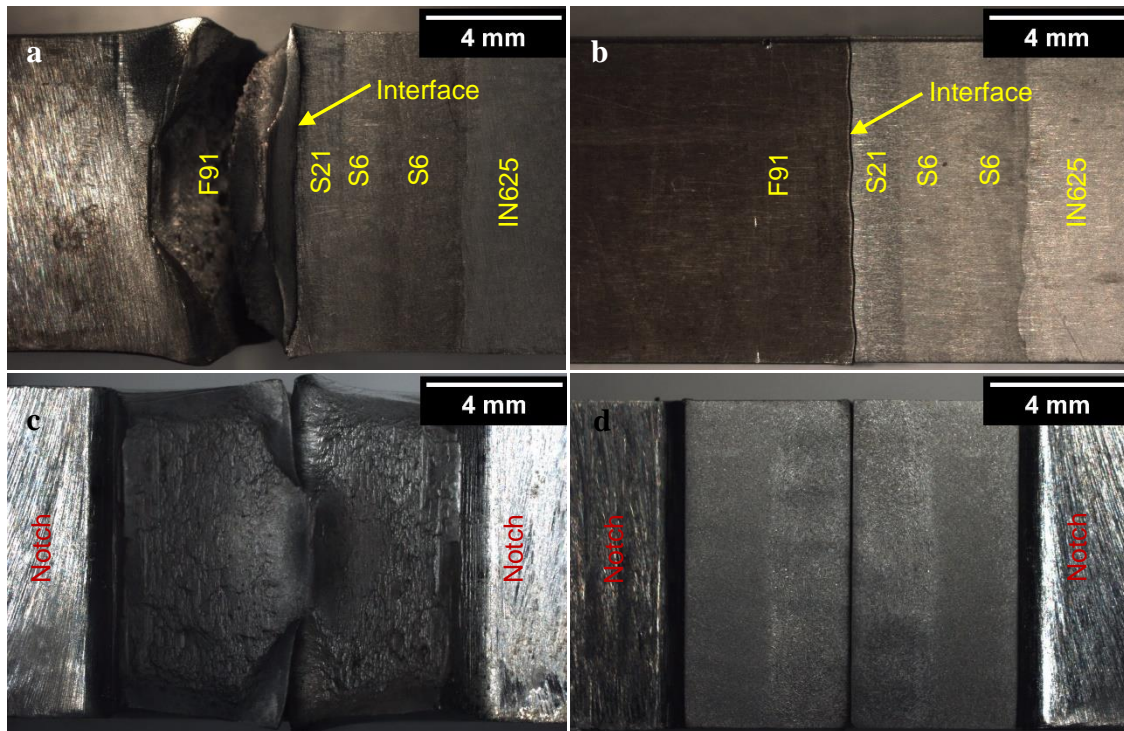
Representative back-faces of the fractured Charpy specimens (a) in the as-tempered condition and (b) after aging; representative macro-fracture surfaces of Charpy specimens (c) in the as-tempered condition and (d) after aging.
